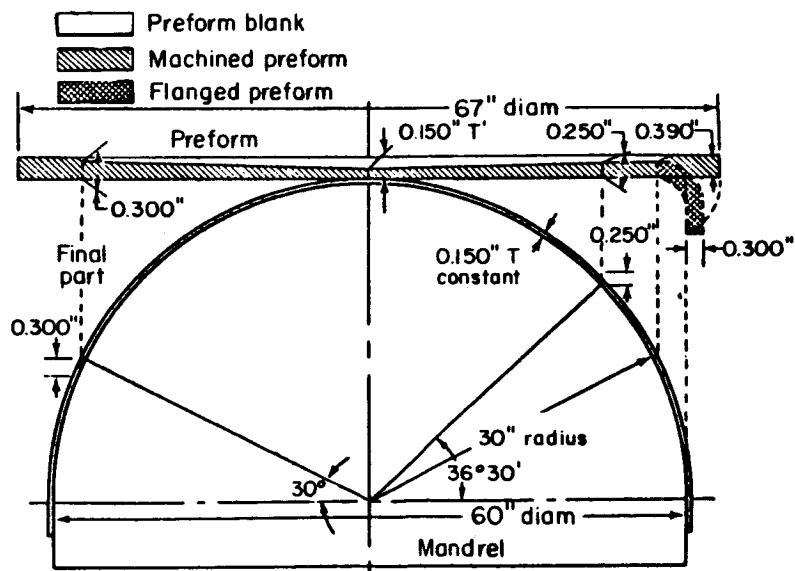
TYPICAL DEVELOPMENT OF A BLANK FOR CONSTANT SHEAR-FORMED THICKNESS (REF. 77)
